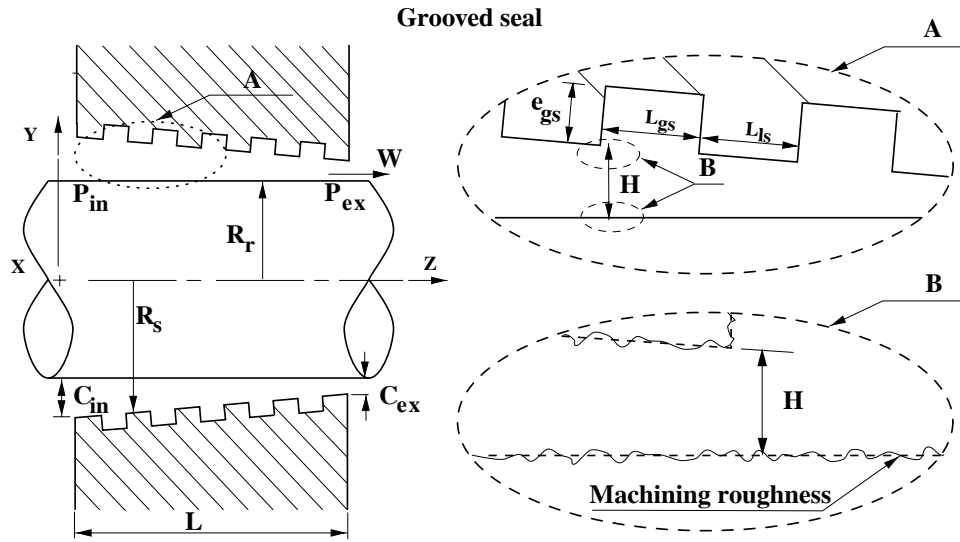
Tapered and grooved liquid annular seal with exaggerated clearance and taper. Detail A shows the parameters for the groove patterns to be studied in this chapter. Detail B shows the machining roughness.
